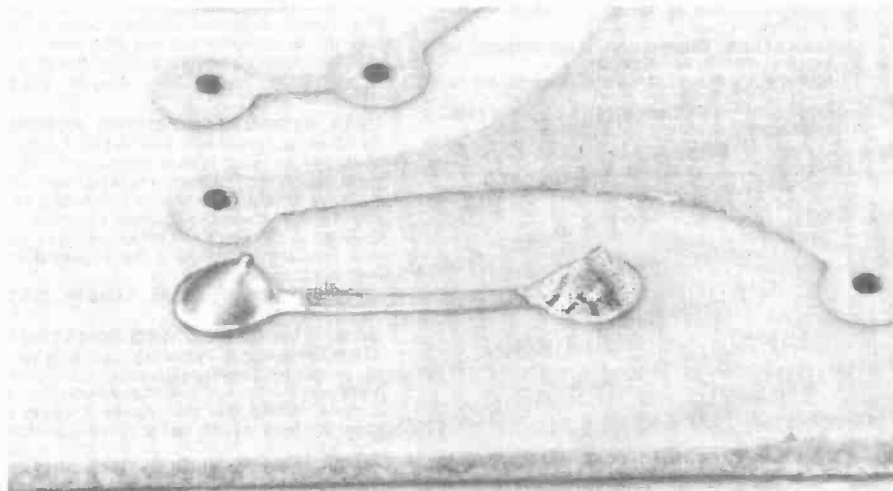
Photo of two soldered joints. The one at left is shiny indicating a good joint. At right, is a "cold" solder joint.
